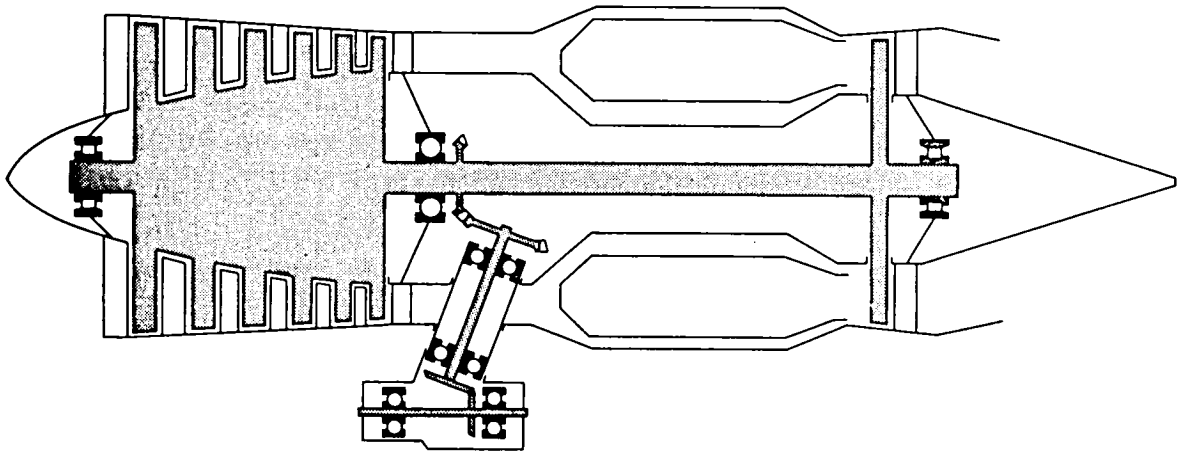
A Simple Gas Turbine Engine That Requires no Shaft Seal System if Self Lubricated and Cooled
